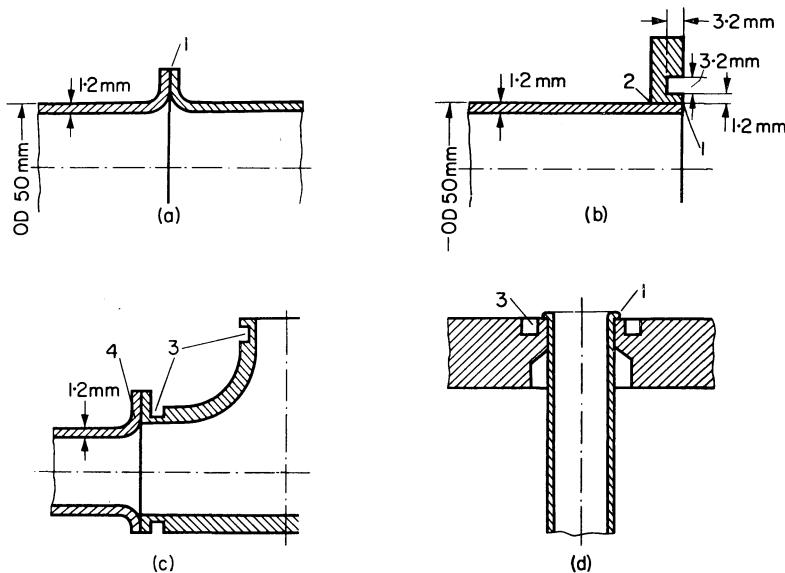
Designs for edge welding: (1) fusion weld; (2) welded points; (3) grooves; (4) flared tubing; (a, b, c) after Grove⁴⁸⁹; (d) after Farkass³⁶⁹ (Courtesy of Pergamon Press)
